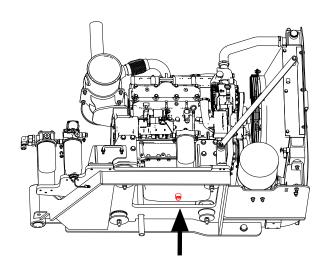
YUCHAI YCF3050 engine oil drain valve
